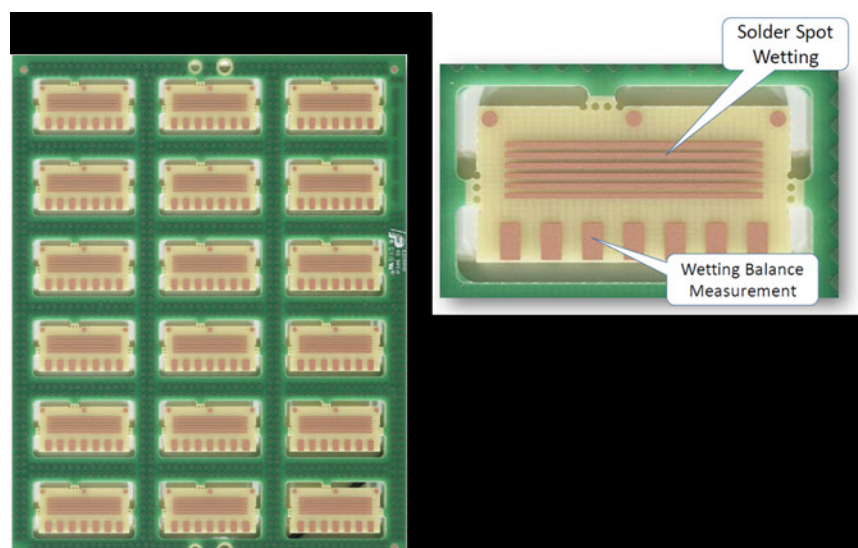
Test board for solderability evaluation. 18 test coupons for solder spot and wetting balance measurements. 6 rows of tracks for spot patterning of 22 paste dots and 7 pads for wetting balance measurement
